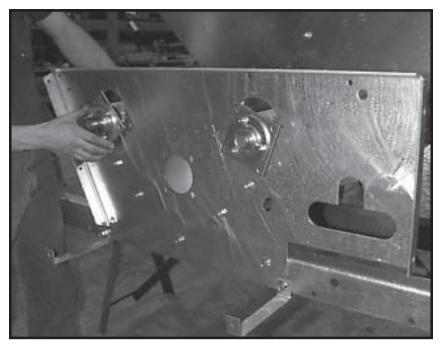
Sliding 1" meter roll assembly on meter roll assembly drive shafts at (front) bottom auger bearing plate.
